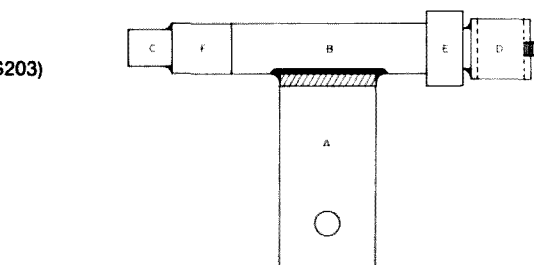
Stylus support details. (A) 1" brass angle bracket. (B) 1" piece of 1/4" (o.d.) brass tubing soldered to the top of the vertical leg of the angle bracket. (C) 1-3/4" piece of 3/16" (o.d.) brass tube soldered at one end to the side of the brass insert from a 1/4" control knob (D). (E) 3/16" (i.d.) wheel collar. (F) 5/16" piece of 1/4" (o.d.) brass tube stock soldered to (C) so that the latter extends beyond (F) on the right side.
